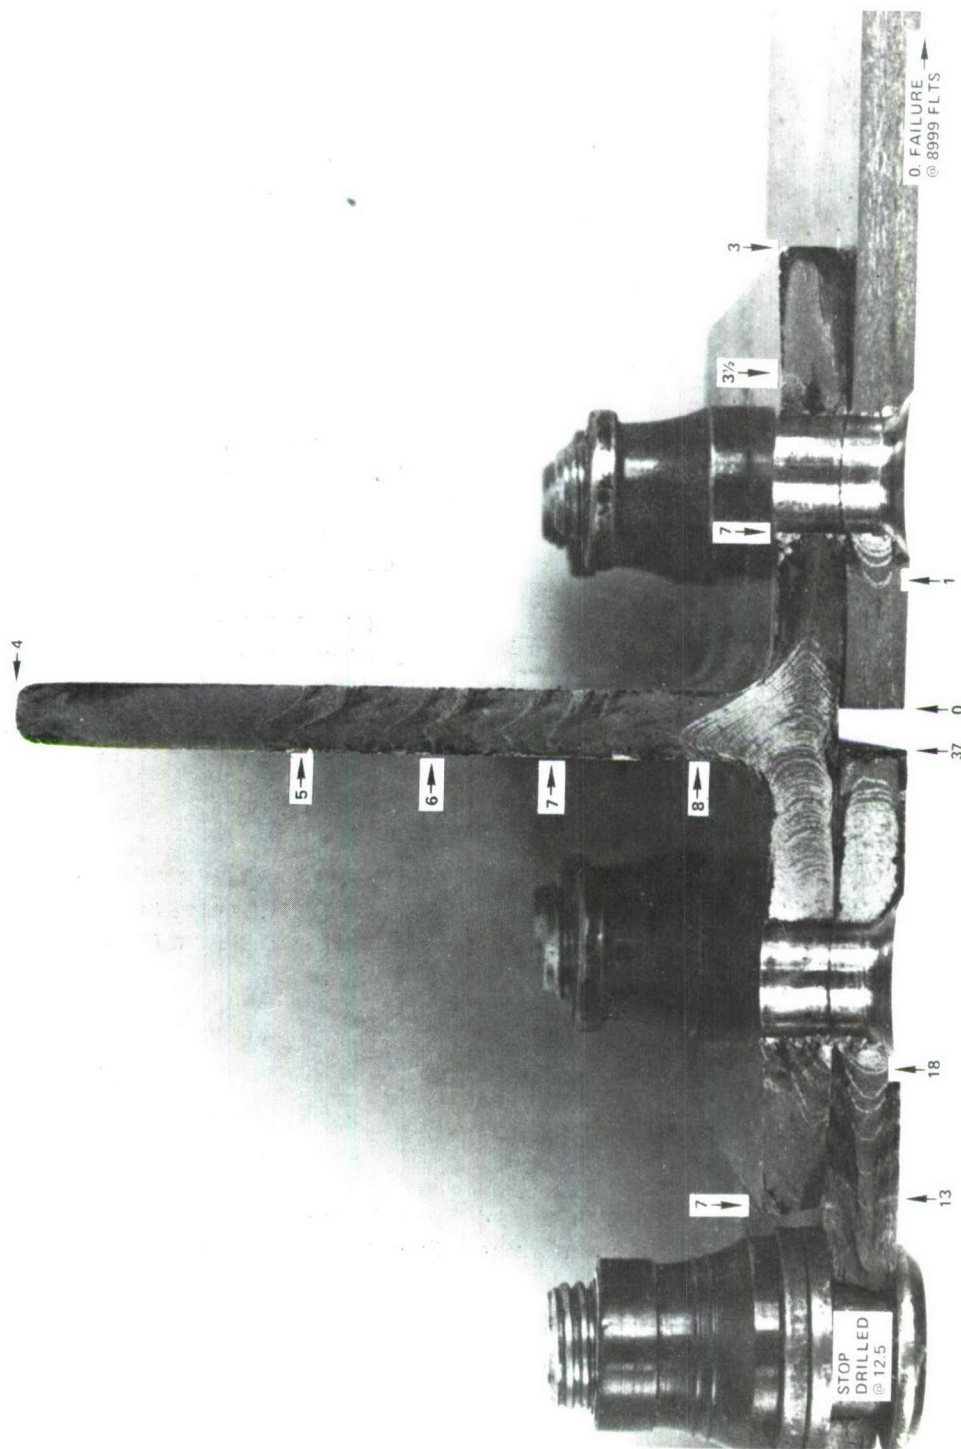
Fracture Surface of Specimen 4.8-3-2 Showing Failure Sequence
